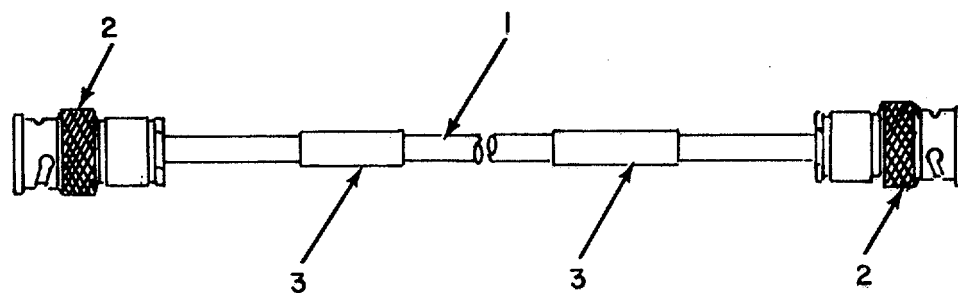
Cable Assembly, Power Electrical CX-12005/USM-159.
